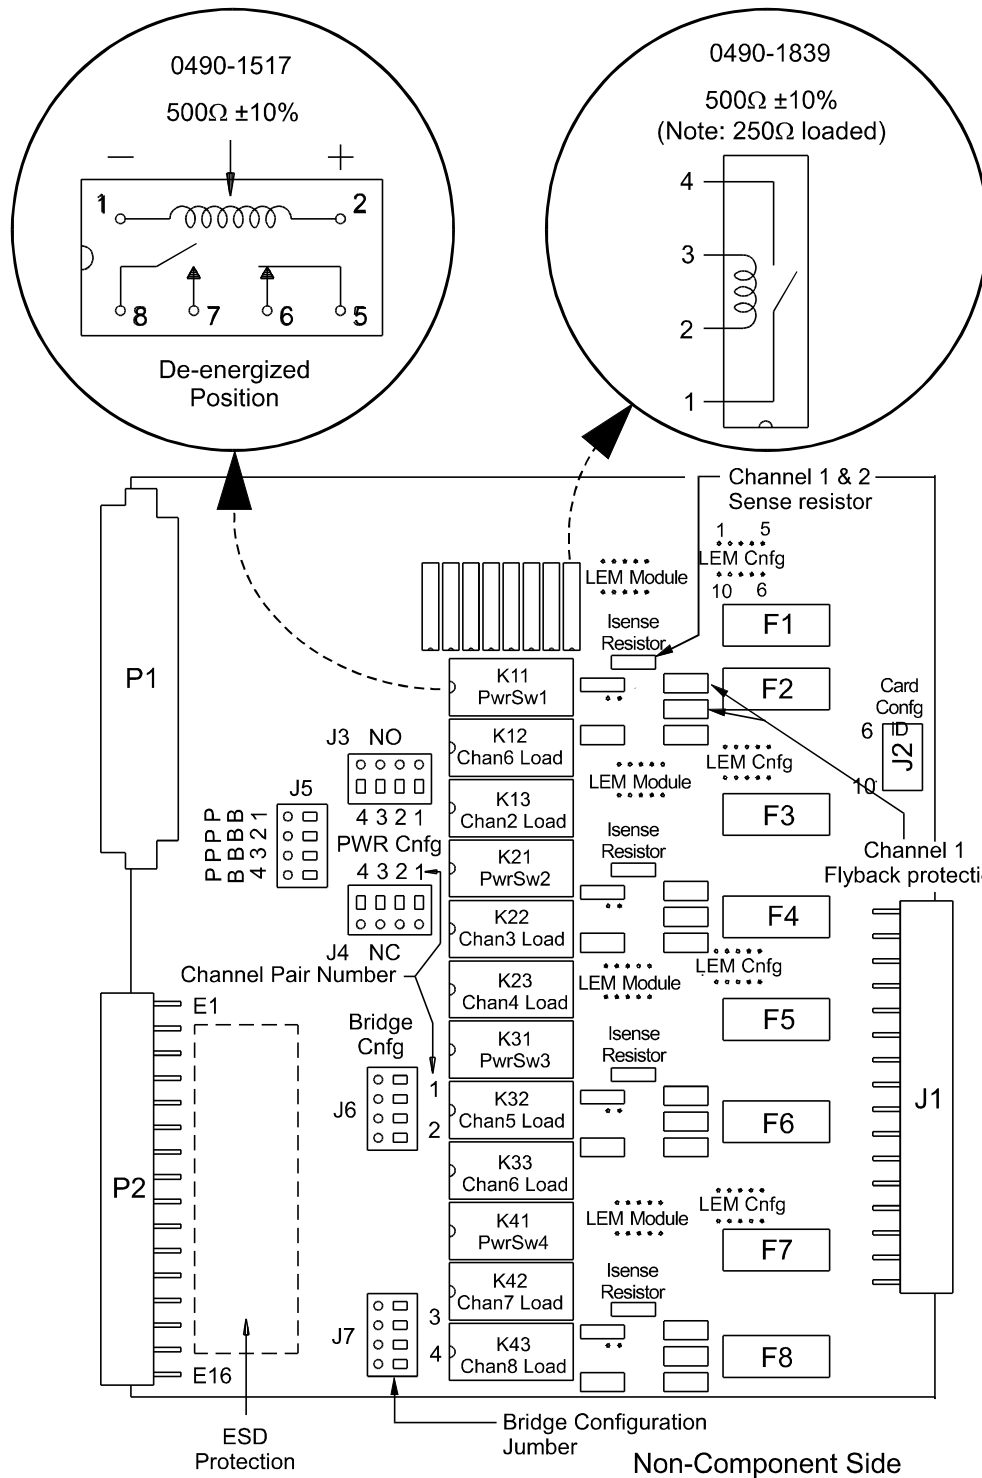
HP E6175A 8-Channel Load Card Component Locator (Rear View)
